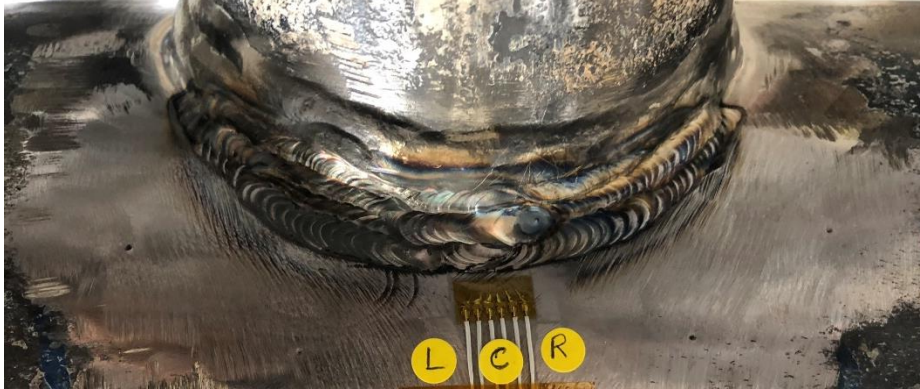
Quadrant Q3 repair by TIG welding after crack removal by grinding. Specimen DT4.
